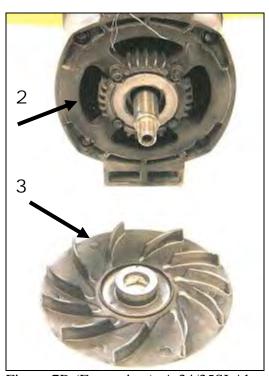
B (Front view). A 34/35SI Alternator damaged by exhaust heat will have a thin layer of black exhaust soot coating on the front of the alternator (Fig. 4C, Ref. 2) and inside of the fan (Fig. 4C, Ref. 3). The hot exhaust is pulled into the alternator and causes it to overheat and fail.
